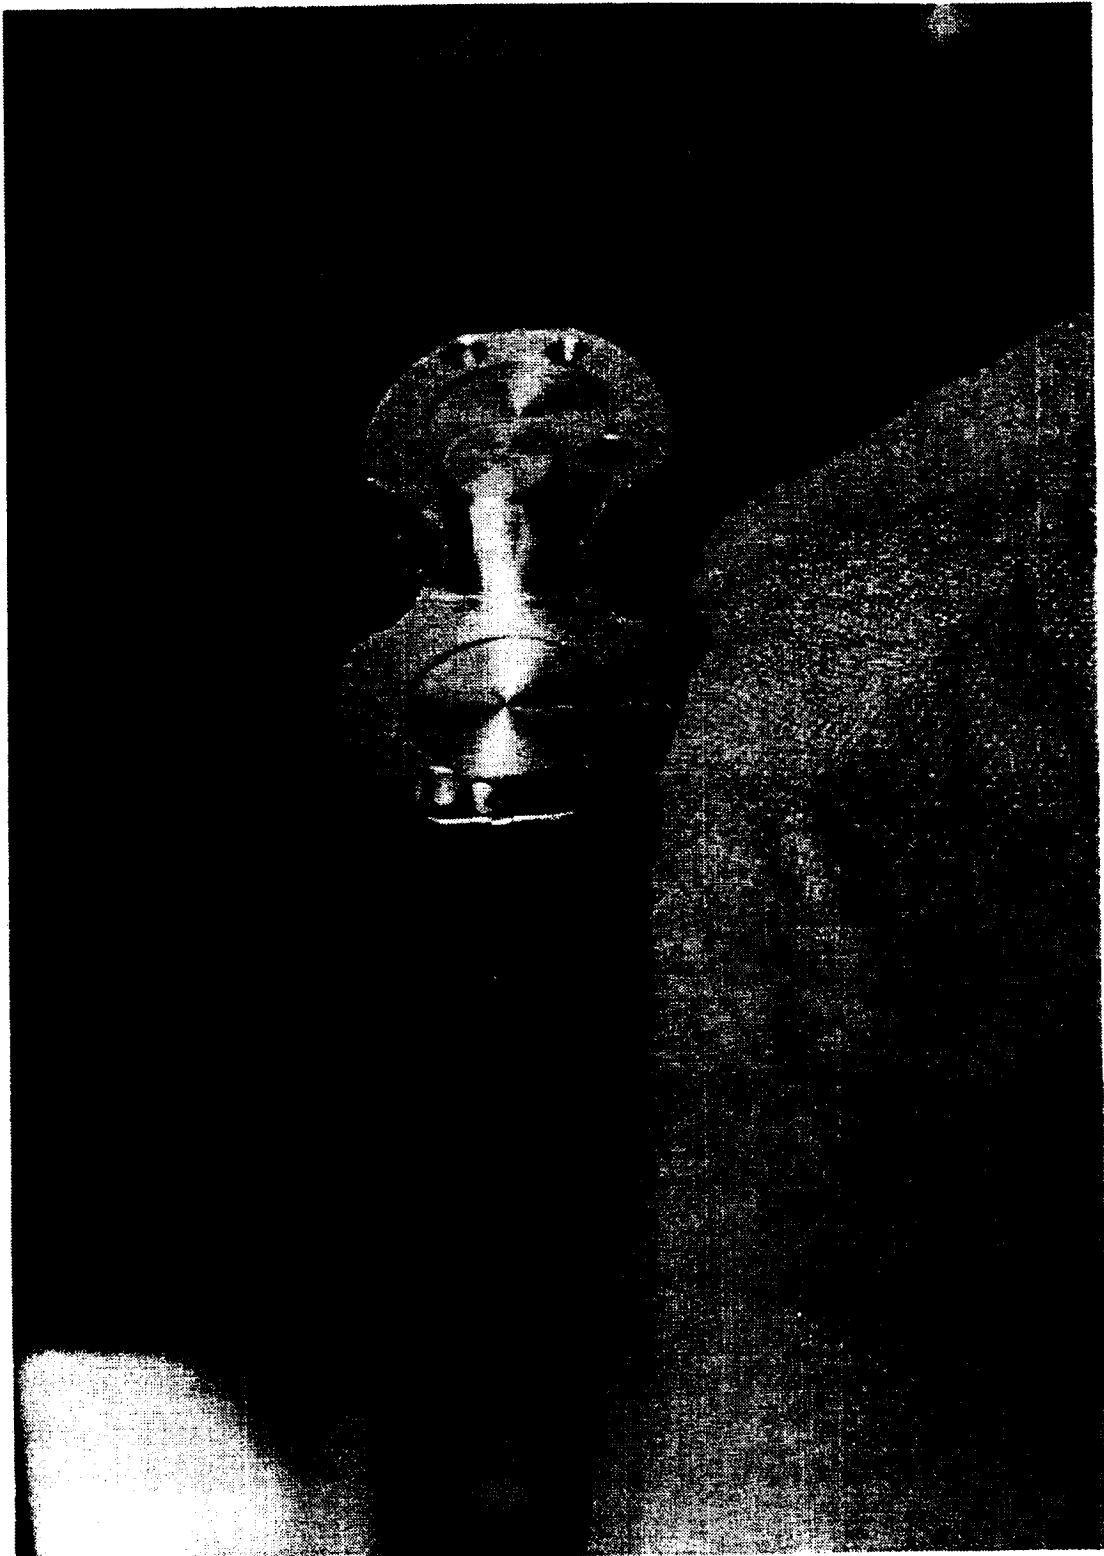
Compressor Rotor with Plugged Lightening Holes
